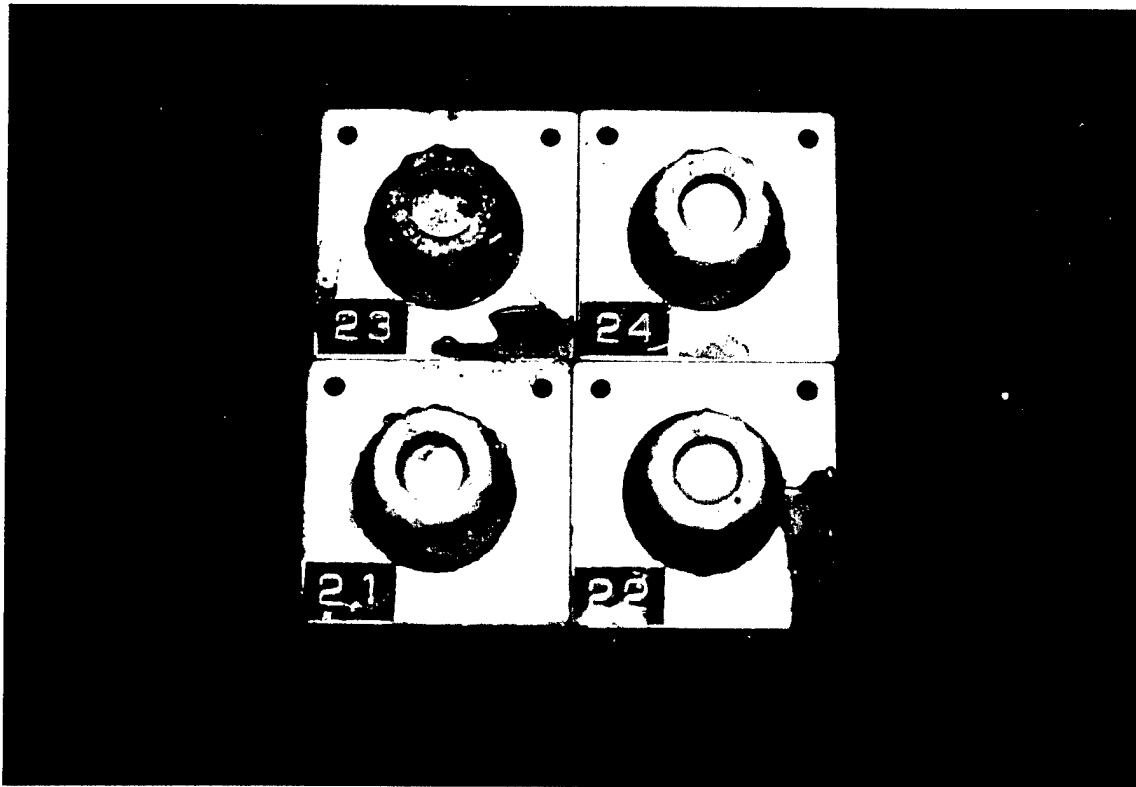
H11 Chromium Hot Work Tool Steel Bolt Heads With Cadmium Electroplate After 44 Days of Salt Spray. Reduced 25%.
